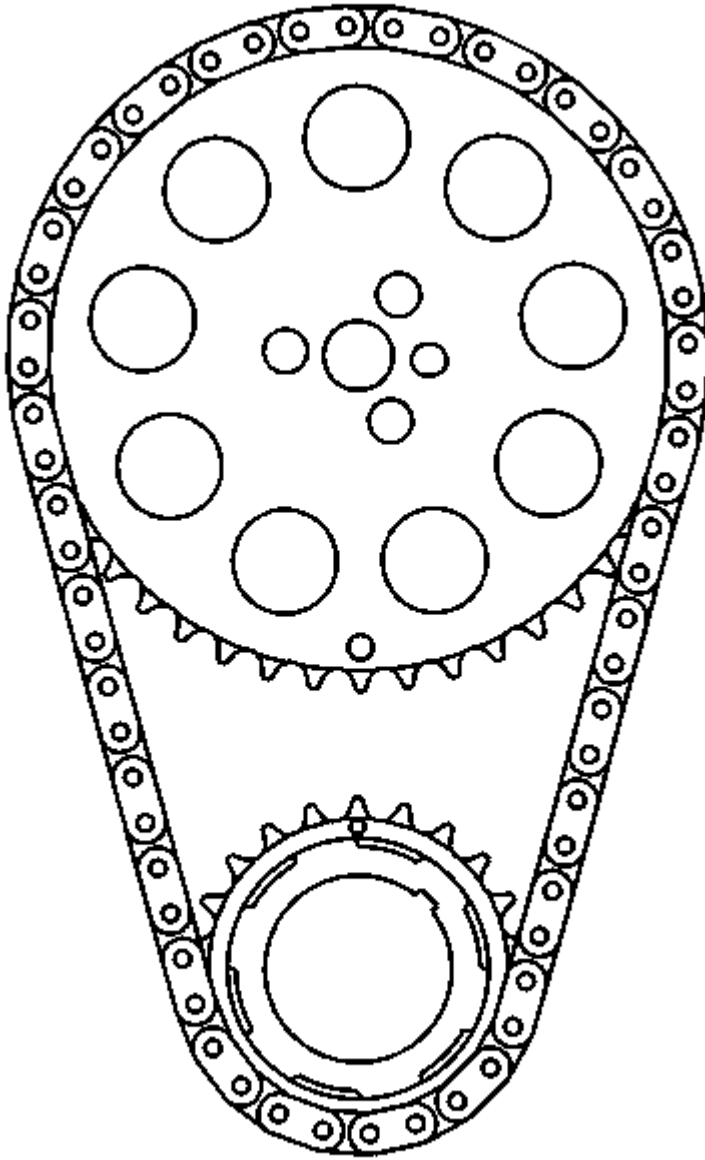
View Of Camshaft & Crankshaft Sprockets Timing Marks Aligned
